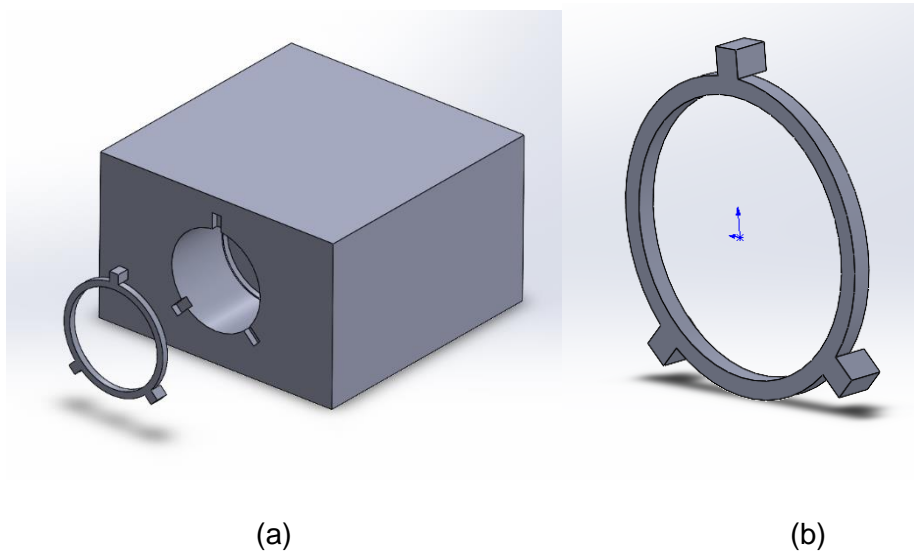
(a) demonstrates a new joint design. This joint has a 5 mm depth bottom section with a 30 mm diameter, similar to the CFRP tubes' diameter. The tube can be inserted into the bottom hole, and this structure can hold the CFRP tube tight and provide further bending support to the CFRP tubes. Figure 46 (b) shows a top holding part to provide additional support to the CFRP tubes to ensure the tubes can be located at the centre of the joining holes. Three rectangular shape parts will join the aluminium joints at the section near the surface. The holding parts will be 3D-printed. A round ring-shaped holder replaced the complex structured holder to simplify the design further, as shown in figure 47 (a). Figure 47 (b) shows that a larger round section near the top of the hole needs to be extruded to fit this holder. The ring shape holder will be 3D-printed.
